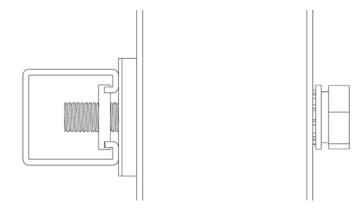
Side rail to frame assembly with spacer and shim placement shown, when applicable (Refer to Support Rail Assembly)
